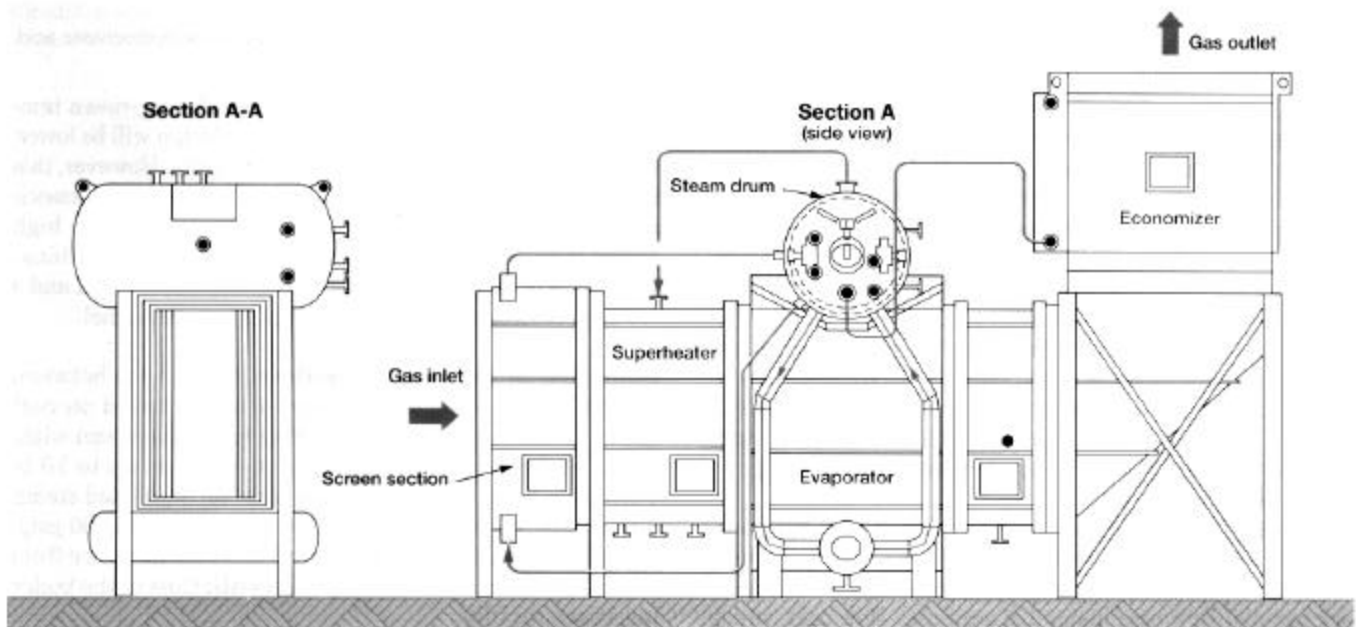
Extended surfaces are used in this water-tube boiler for a fume incinerator because the flue gas is clean.
